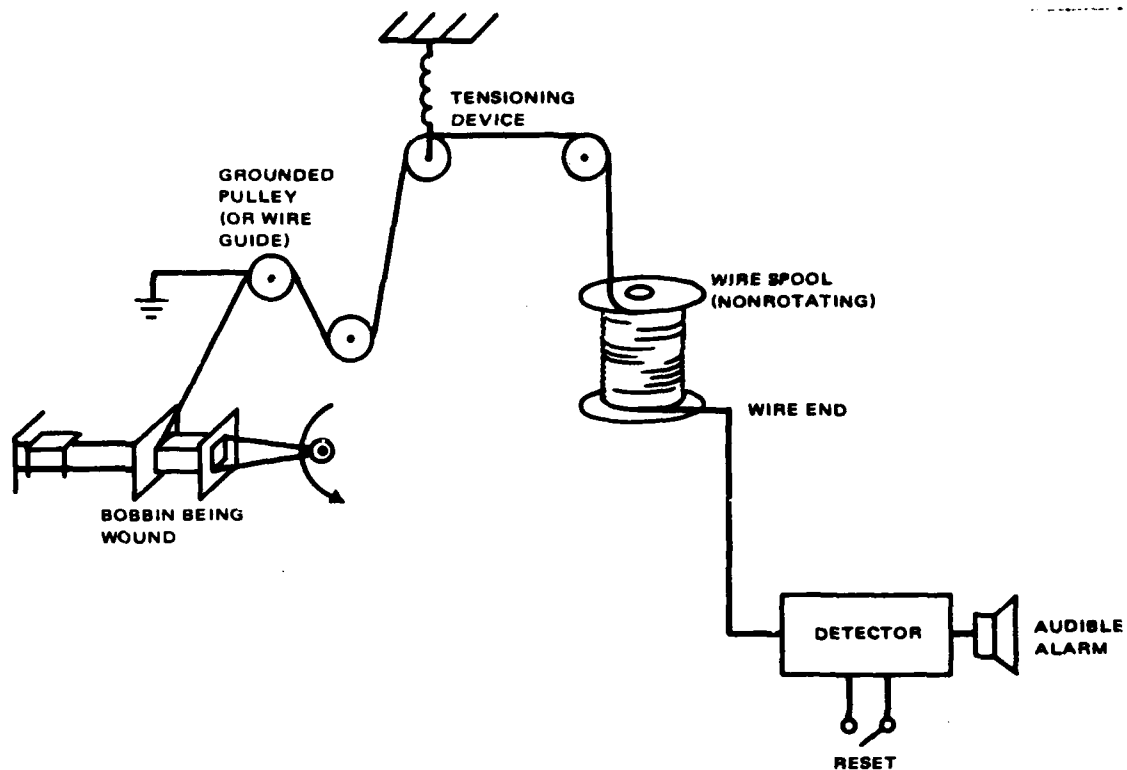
Bobbin winder wire damage detector — block diagram.
